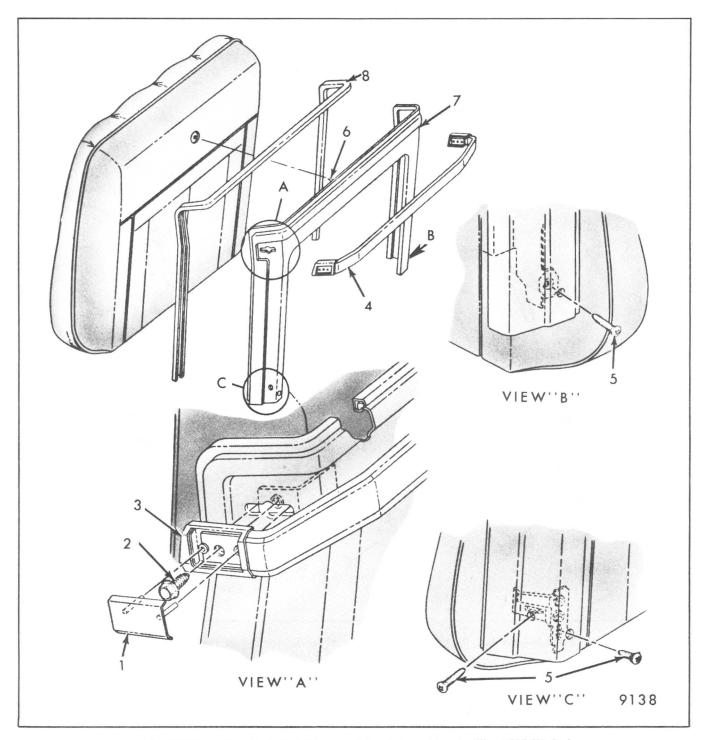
Front Seat Back Assist Strap and Panel Assembly - Cadillac "6CB69" Style
